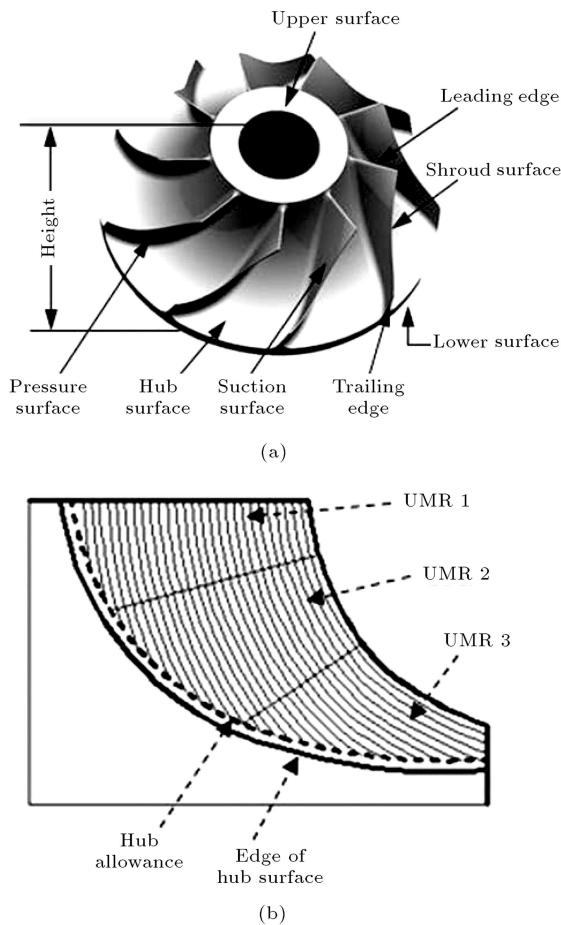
Surface model of a centrifugal impeller: (a) Geometric features; and (b) UMRs rough-cut regions.
